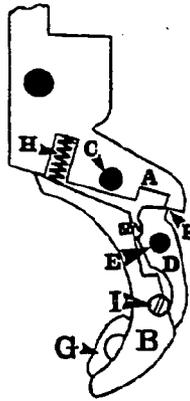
This single set trigger developed by Canjar in the forties uses one trigger to both set and fire the mechanism. The set shoe B, containing release tab D and the required springs, attaches to the lower stub of trigger piece A rather than being mounted in the trigger guard. Set shoe B is recessed for tab D, which pivots at E. Pushing the shoe forward latches the release tab at F and lets it protrude forward at G. A touch on the tab at G releases it, and coil spring H snaps the shoe back to fire the main trigger. Pull adjusts from two ounces down to less than an ounce by screw I.
